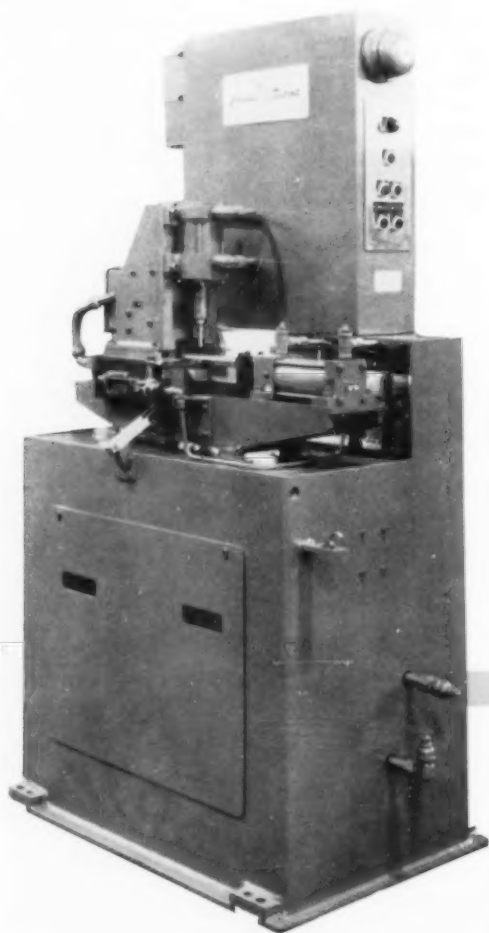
Through-feed automatic unit testing parts for strength of braze. This unit tests 1800 parts per hour.
